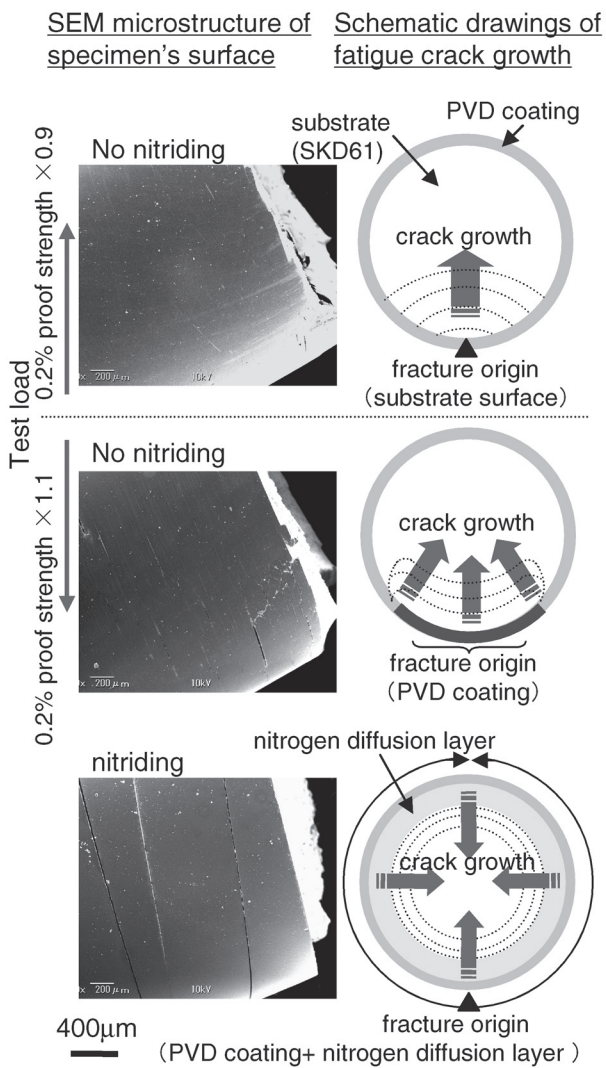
Schematic drawings of fatigue crack growth on surface treatment specimen.
